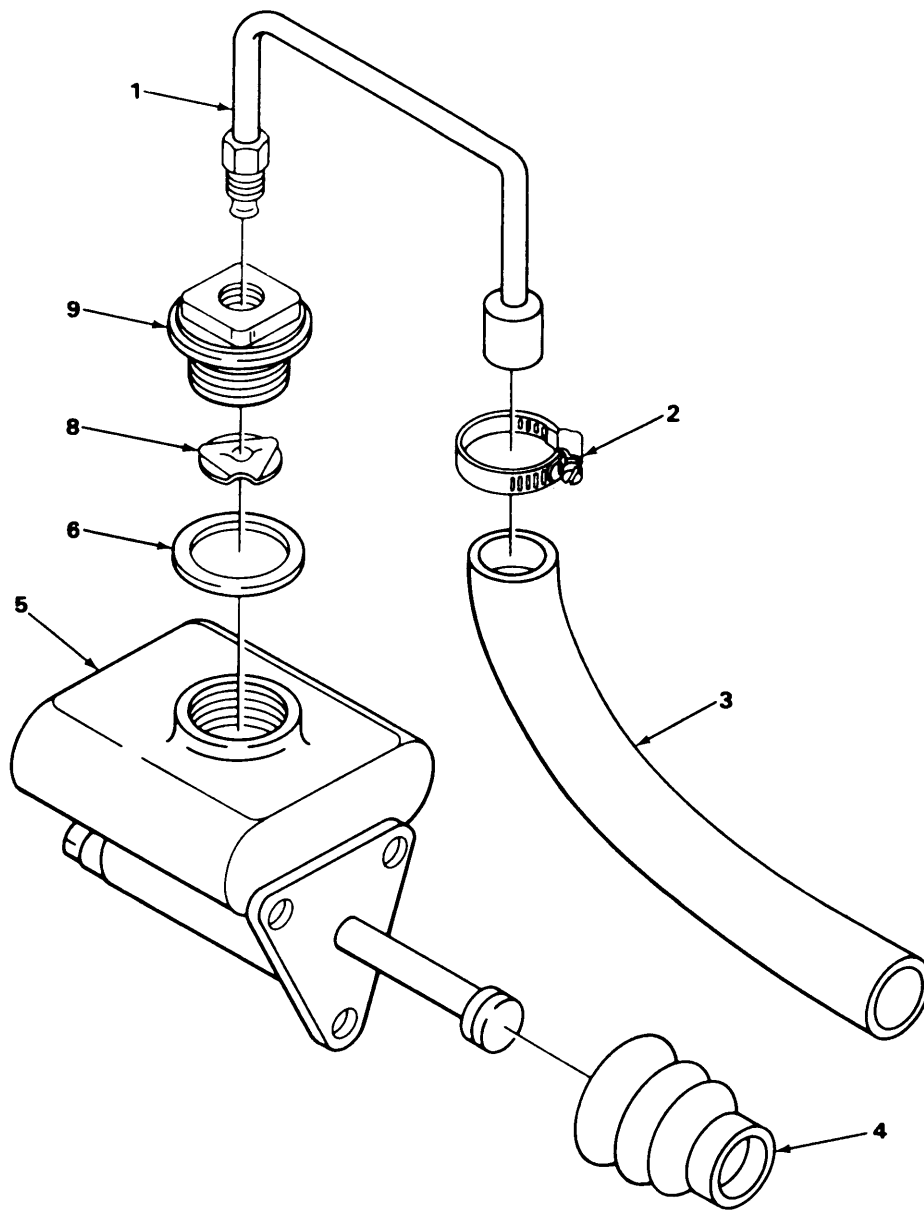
MASTER CYLINDER HYDRAULIC BRAKE ASSEMBLY.
